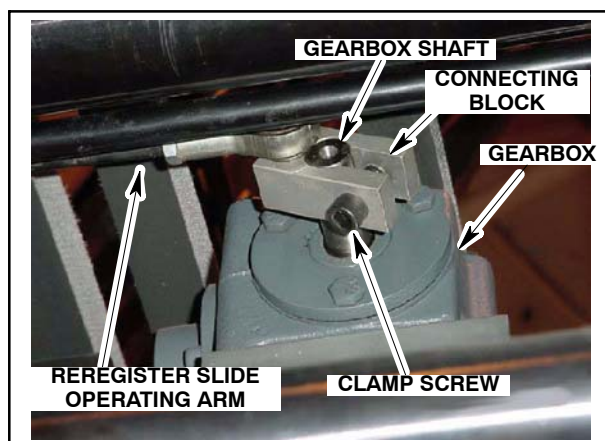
Locate the Reregister Section (View from Under Machine)
